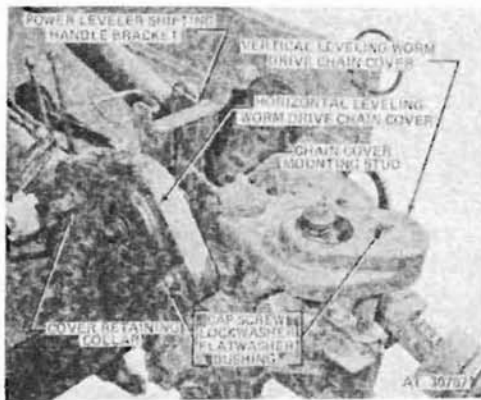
Earth boring machine leveling worm drive chain covers - installed
